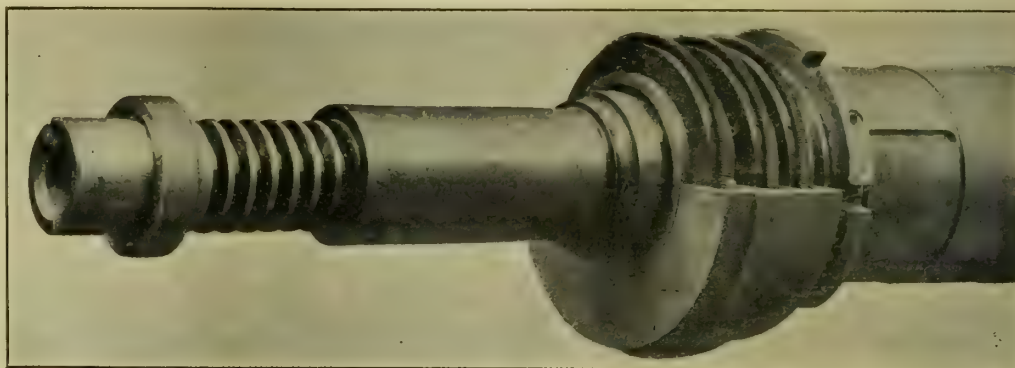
PART OF SHAFT OF CURTIS STEAM TURBINE, SHOWING CARBON PACKING.
